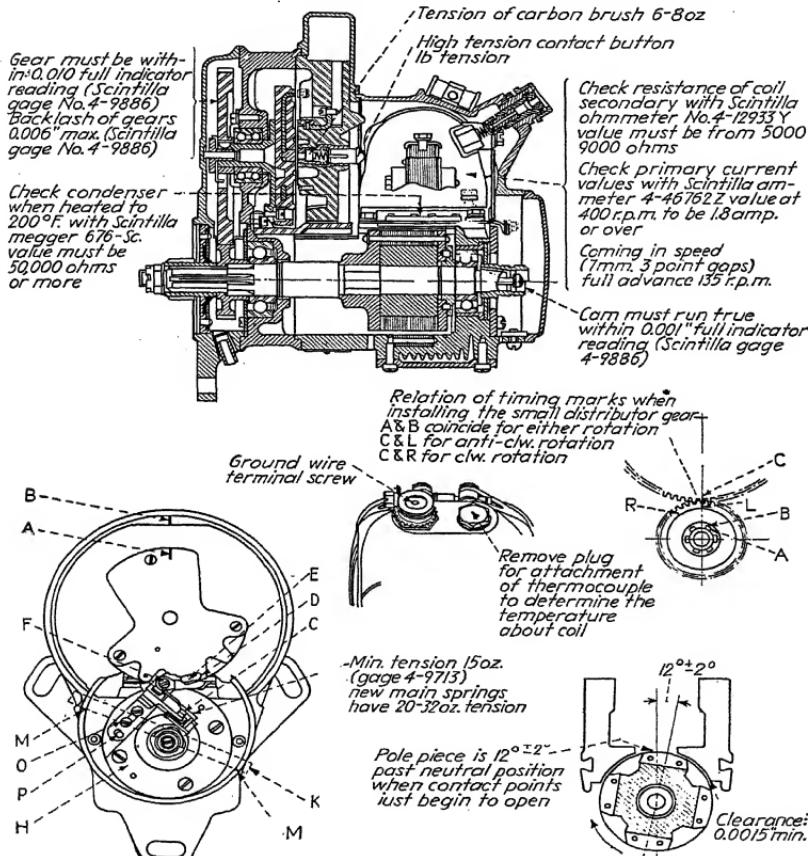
Details of Scintilla magneto shown in Fig. 2.
